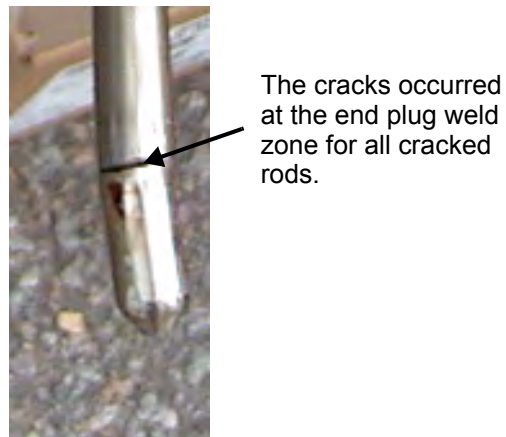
Cracked Rod From CTU Fuel Assembly
